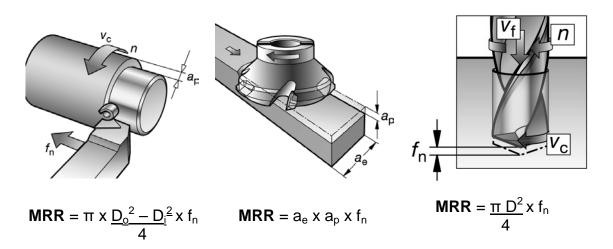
The 3 cutting variables & MRR for Turning, Face Milling & Drilling.
